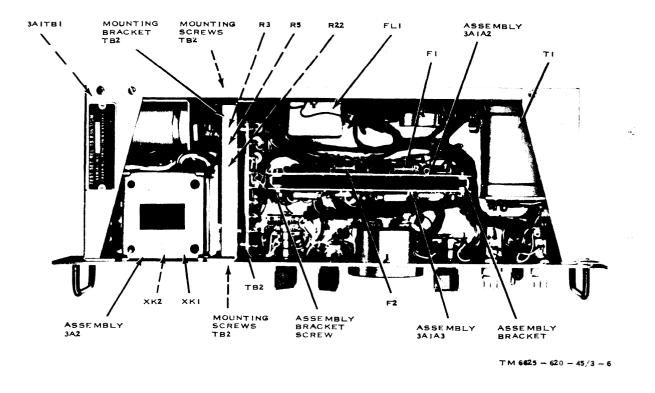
Test Set, Relay TS-836/UGM-1, top view.
